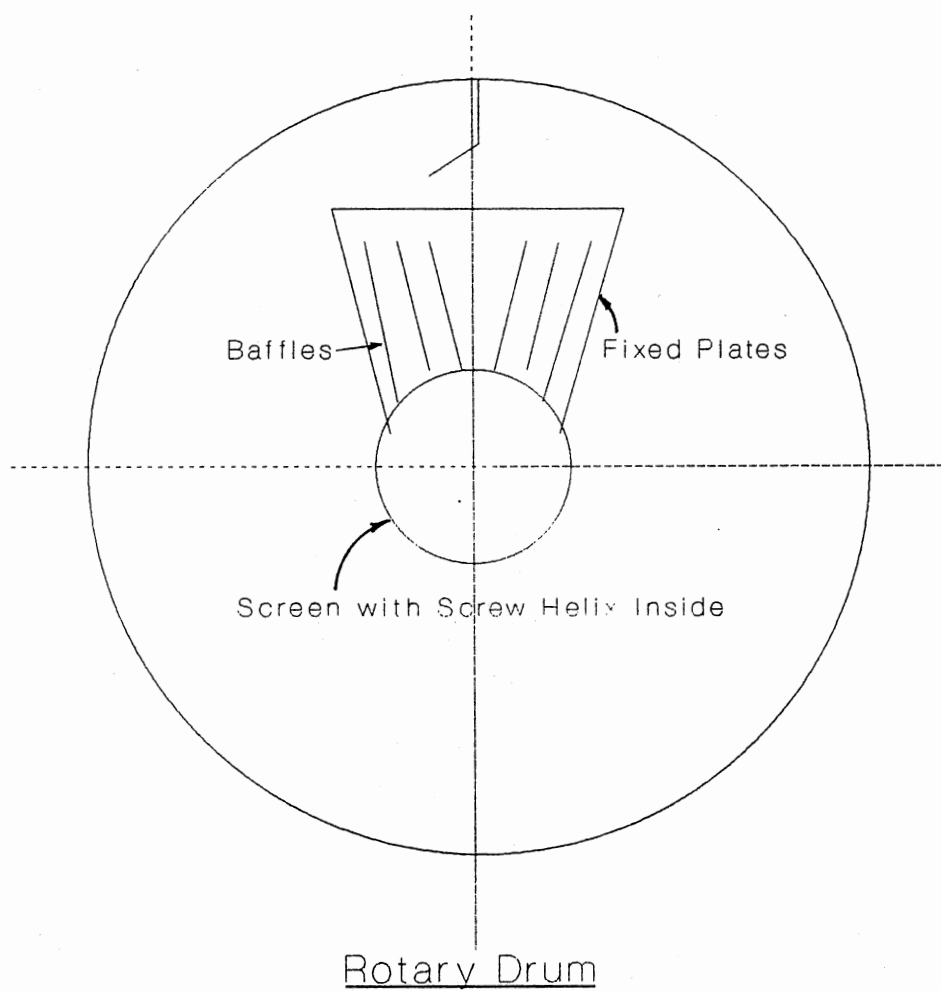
Schematic Drawing of Modified Fixed Plates Inside the Drum
